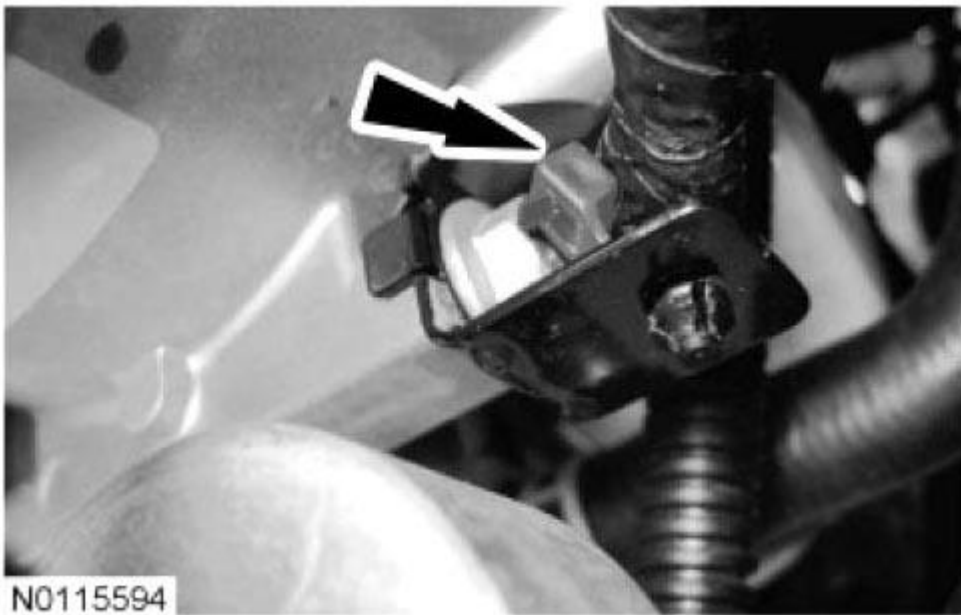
Locating Wiring Harness Retainer To Lower A/C Compressor Bracket
